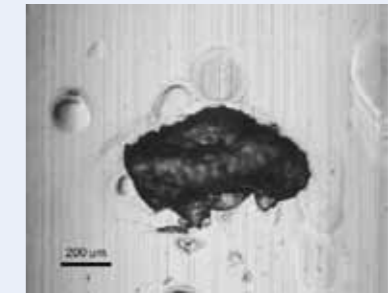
Dent initiated flaking. Bearing A, $L = 11$ (h), Inner ring flaking.
